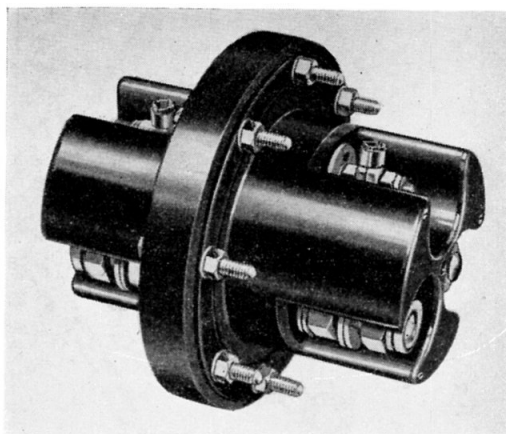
Heavy-duty pressure-proof bulkhead connector
